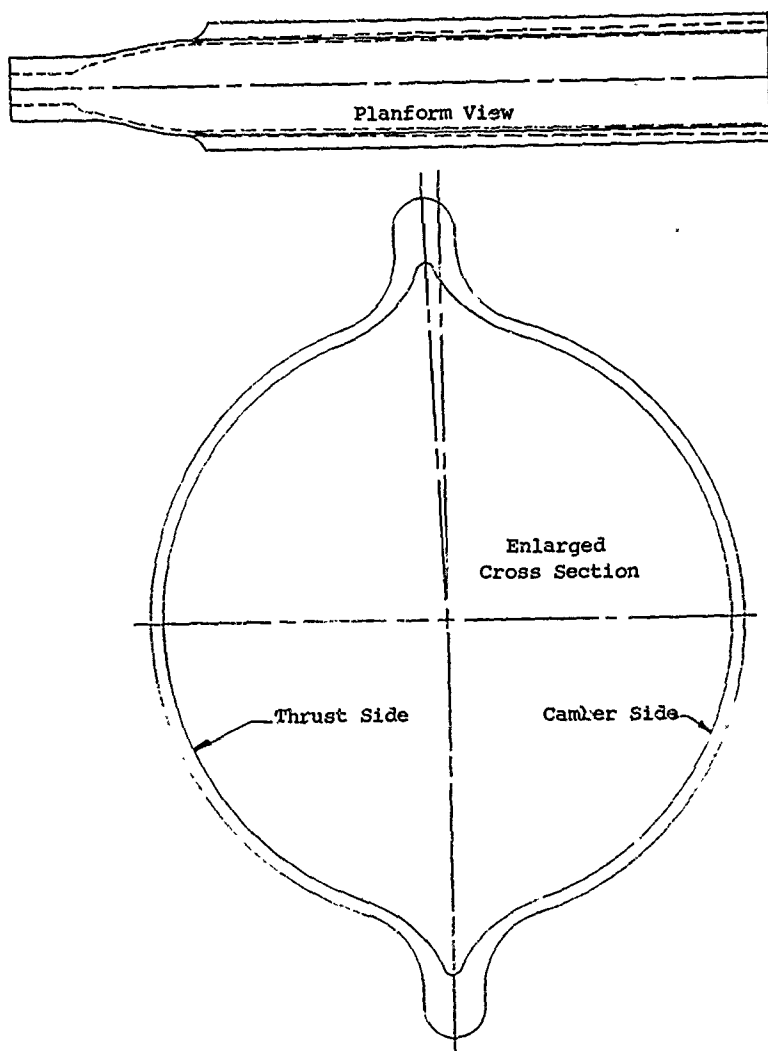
Extruded Hollow Steel Blade Tubular Blank.
